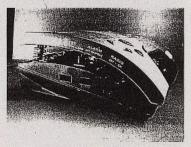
Successful active disassembly of the macro assembly of the Philips digital FM audio.
